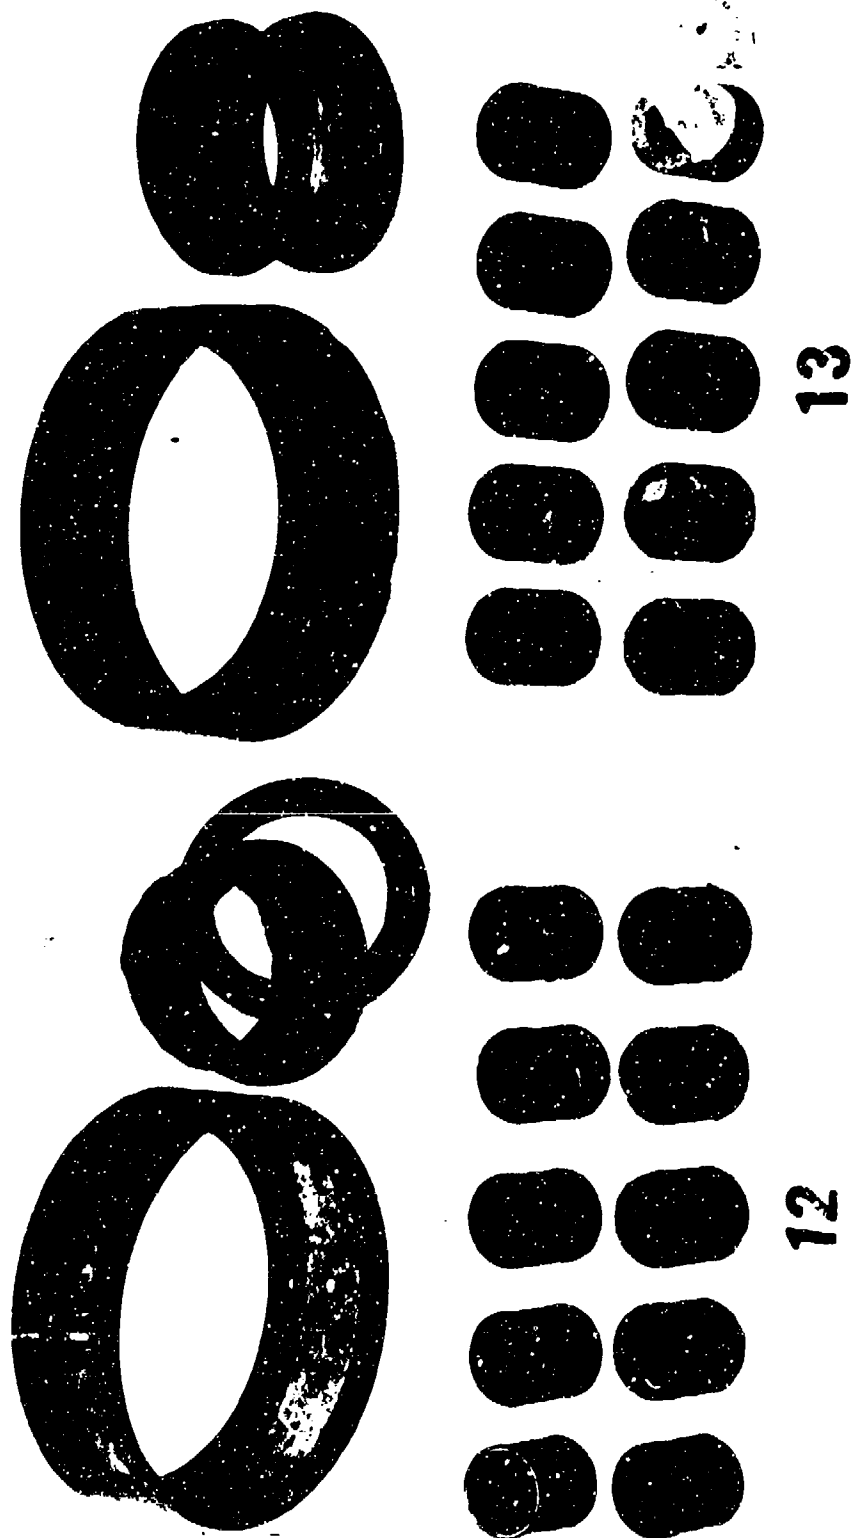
FAILED ROLLER BEARING TESTS 12 AND 13
